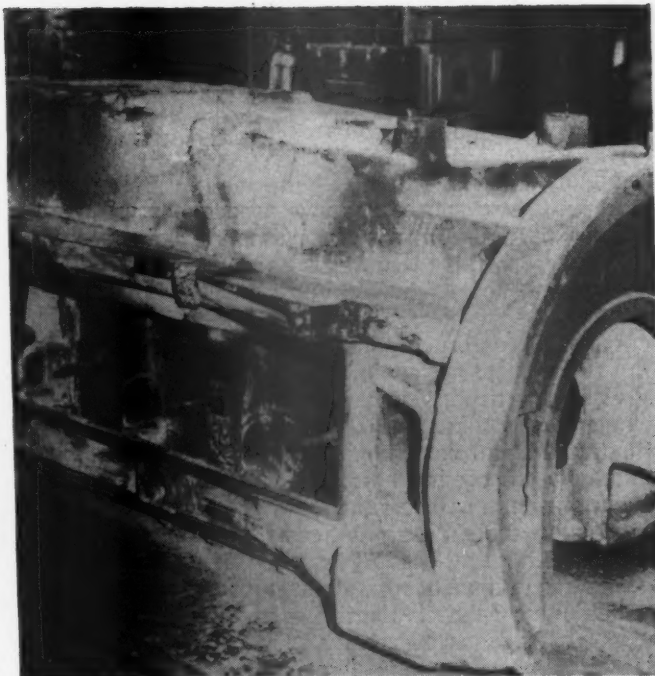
Diesel-engine base after welding and removal from furnace
